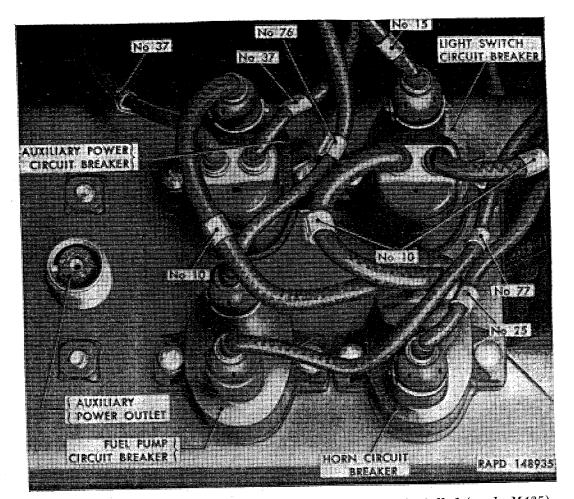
Circuit breakers and auxiliary power outlet installed (early M135).
